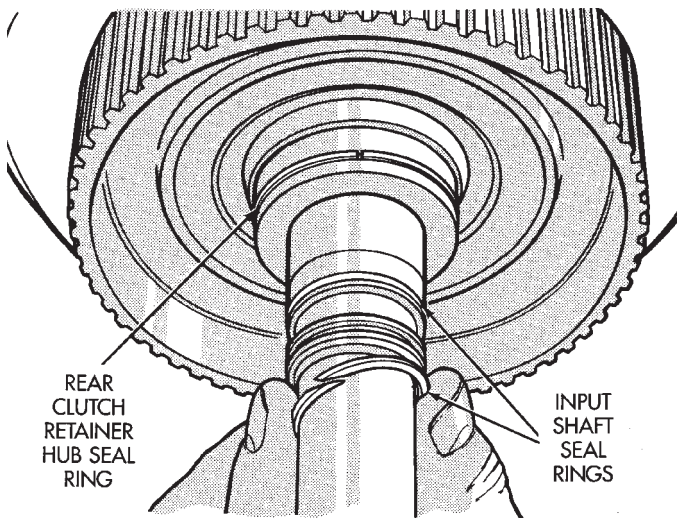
Removing Input Shaft From Rear Clutch Retainer
